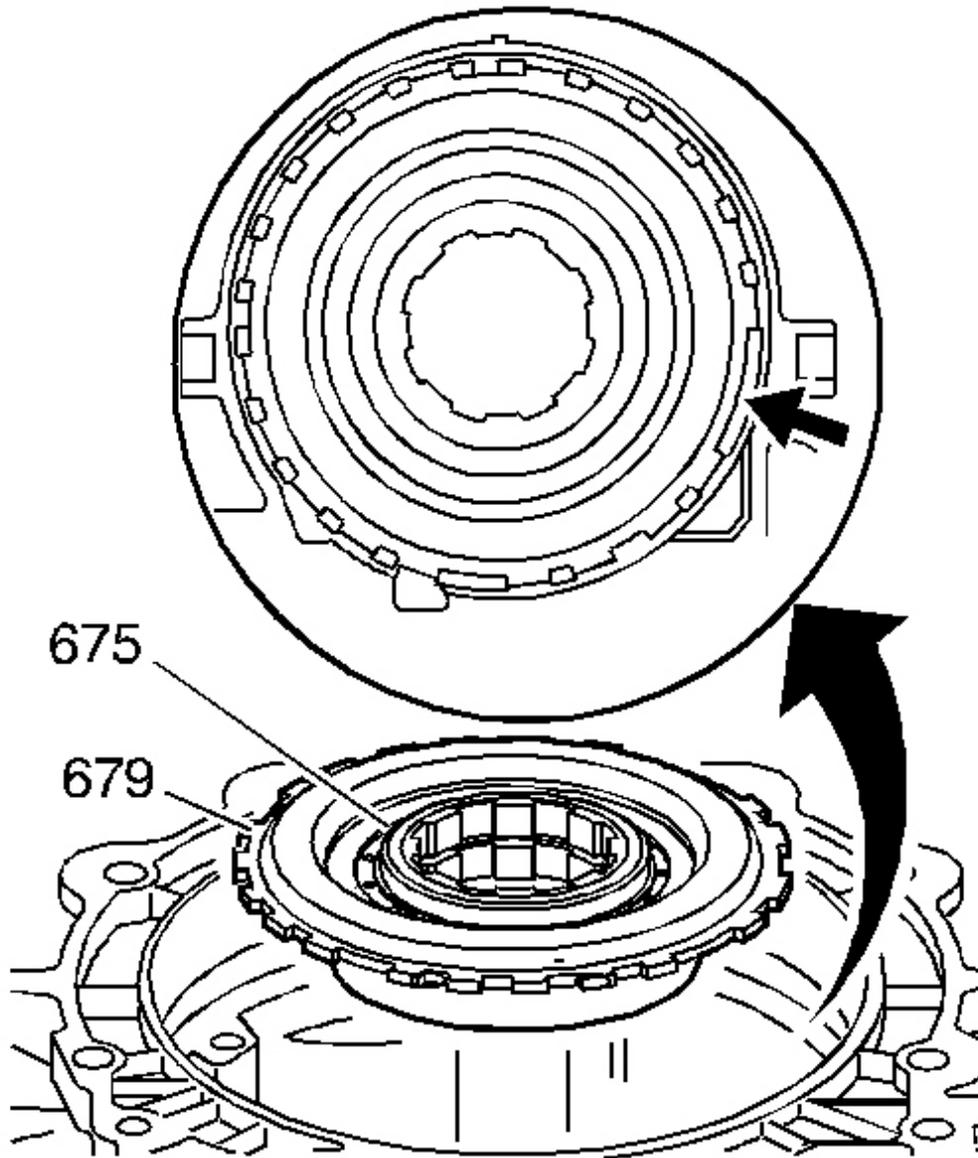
Low & Reverse Clutch Support & Roller Clutch & Roller Clutch Race Assembly
